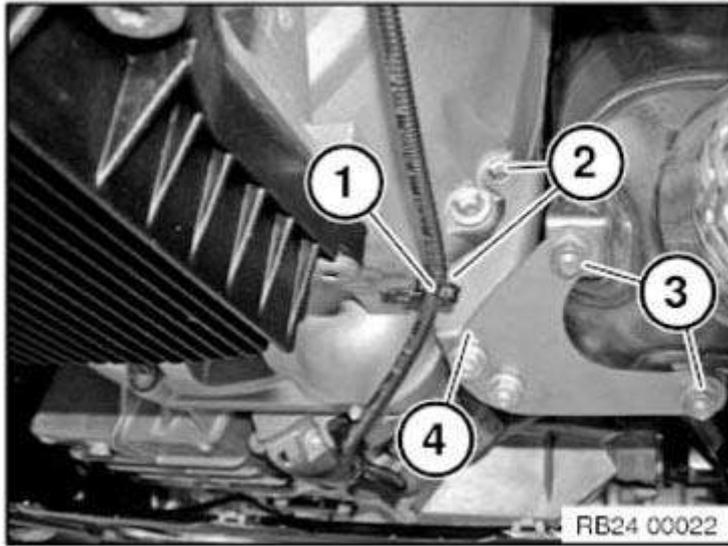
Identifying Cable Holder From Gearbox, Screws And Nuts
